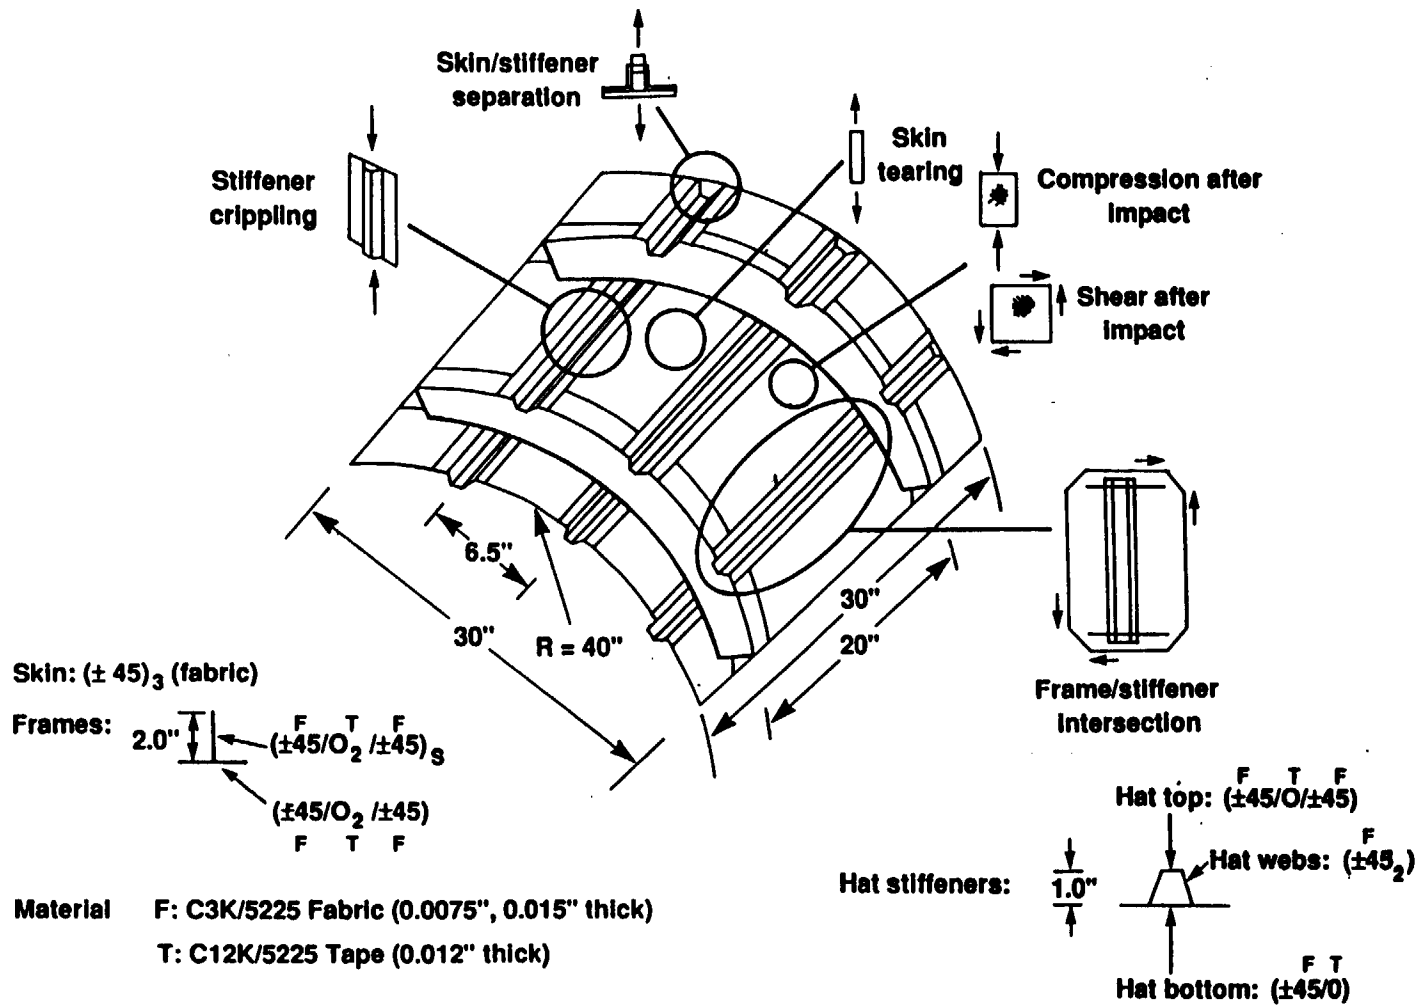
FULL-SCALE PANEL AND BUILDING BLOCK TEST SPECIMENS
